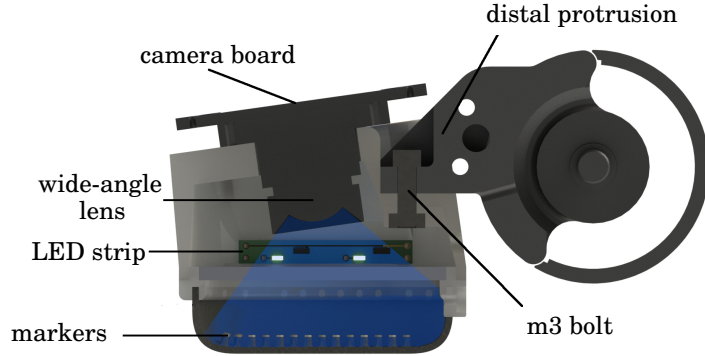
Computer modelled cross-sectional view of fingertip assembly.
